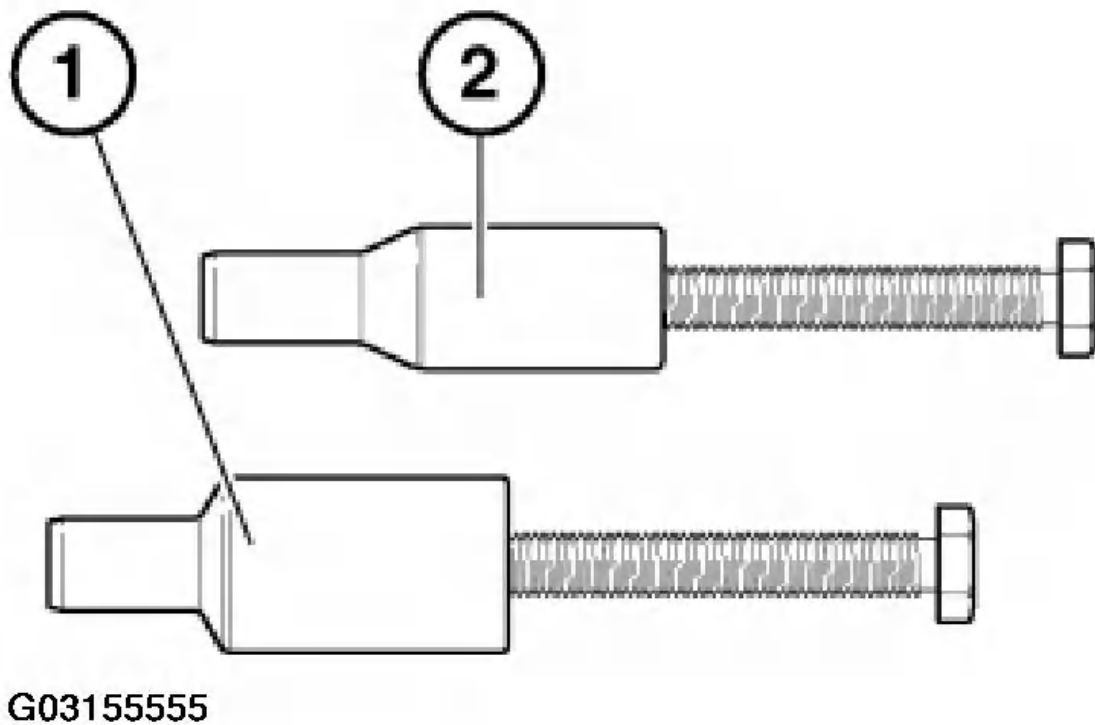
Identifying Special Tool - Clutch Centering Mandrel (2 X)
